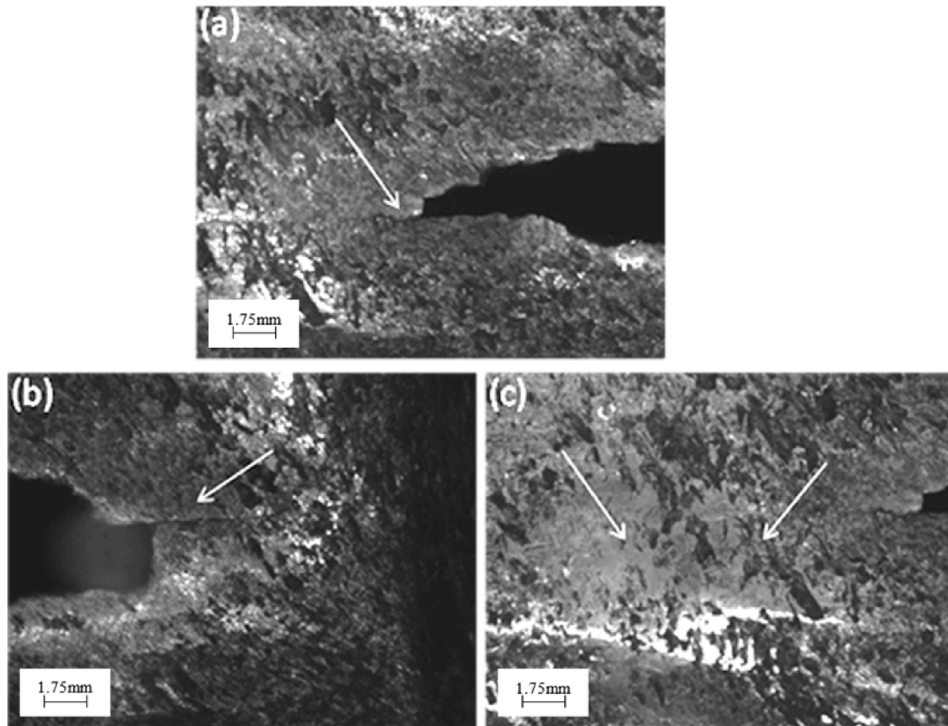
Fracture surface analysis by stereo microscope.
